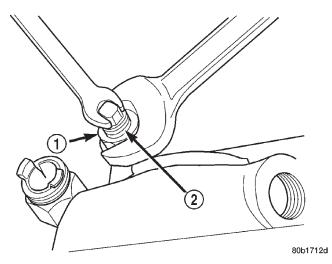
Front Band Adjustment Screw Location - LOCK-NUT
